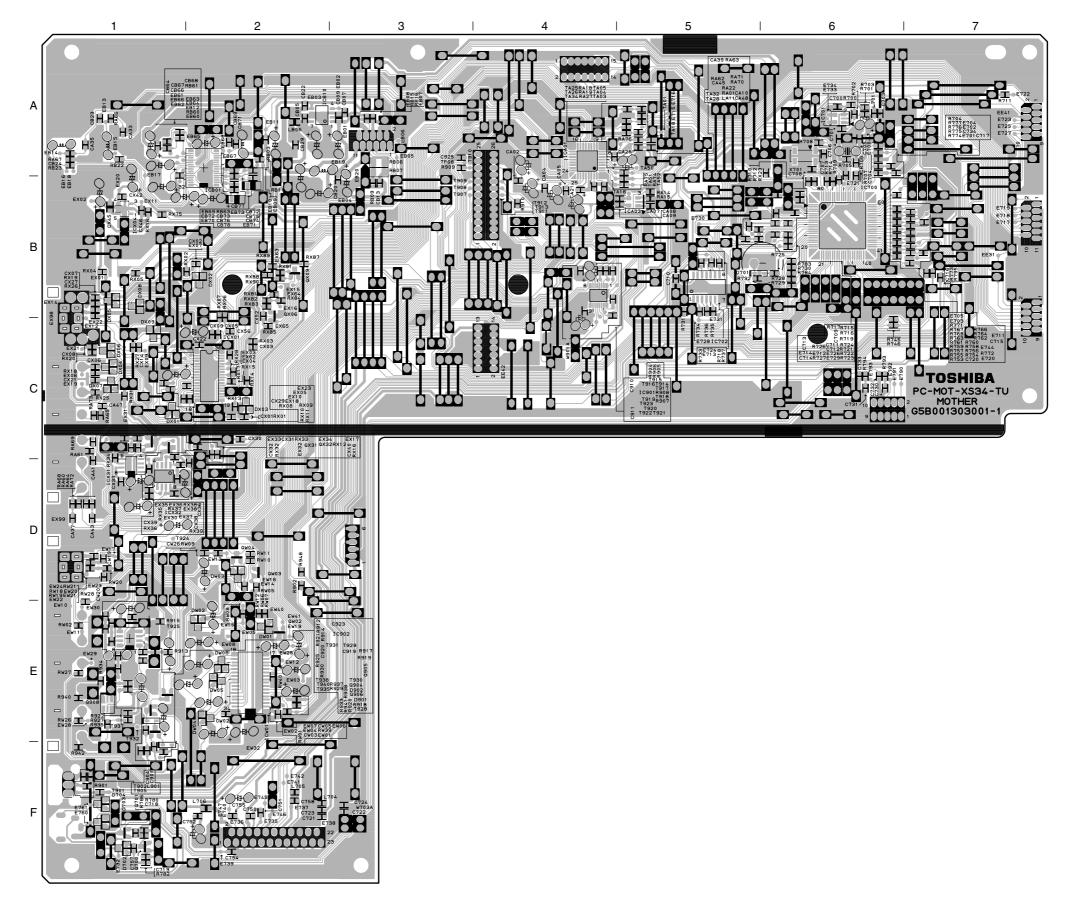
EU05 Mother PC Board (Bottom side)
